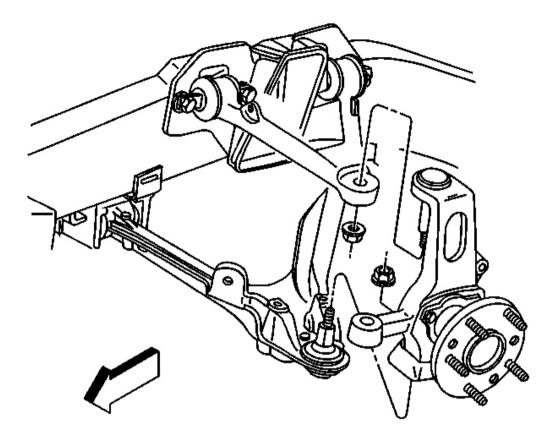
Lower Control Arm & Outer Tie Rod Ball Stud Courtesy of GENERAL MOTORS CORP.
